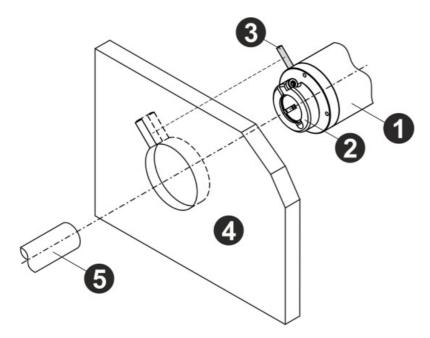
Mounting with lateral dowel pin and customer-side groove, principle illustration
